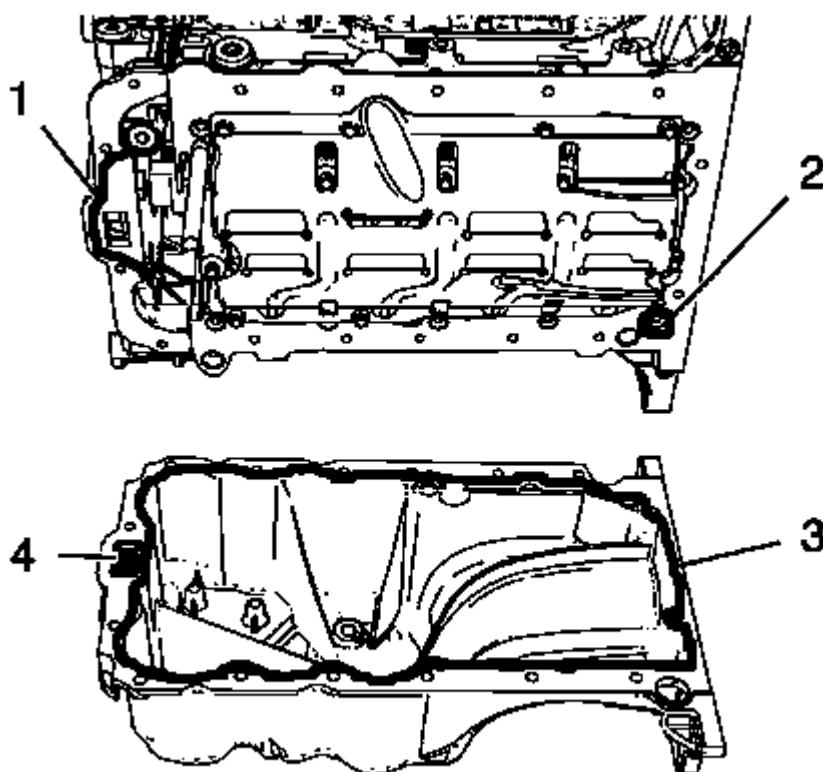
Engine Front Cover, Oil Suction Gallery And Screw Bore
